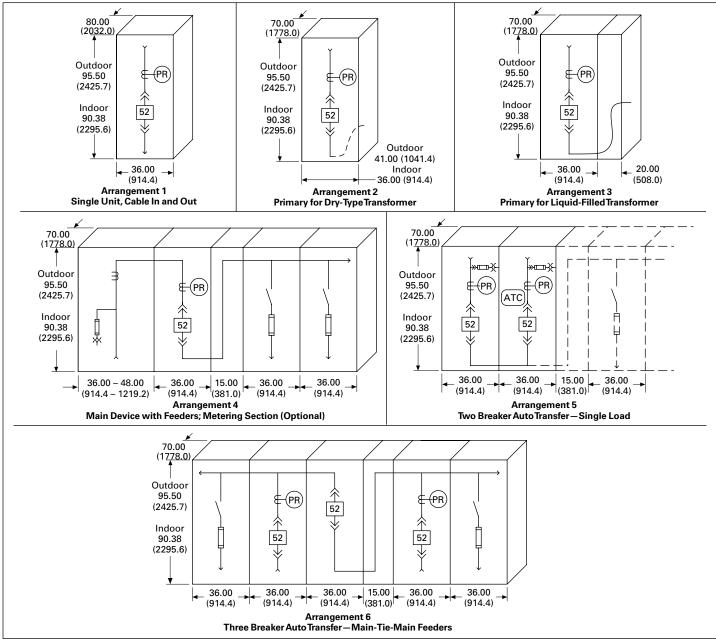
Typical Arrangements—5 kV and 15 kV — Dimensions in Inches (mm)
